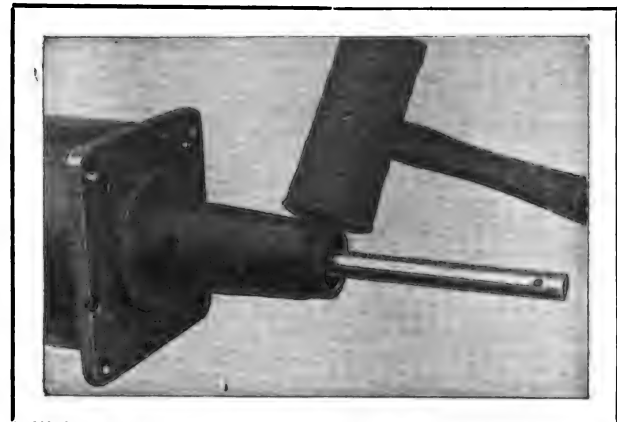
, Method of Straightening Bracket if Bendix Drive Binds on Shaft.
